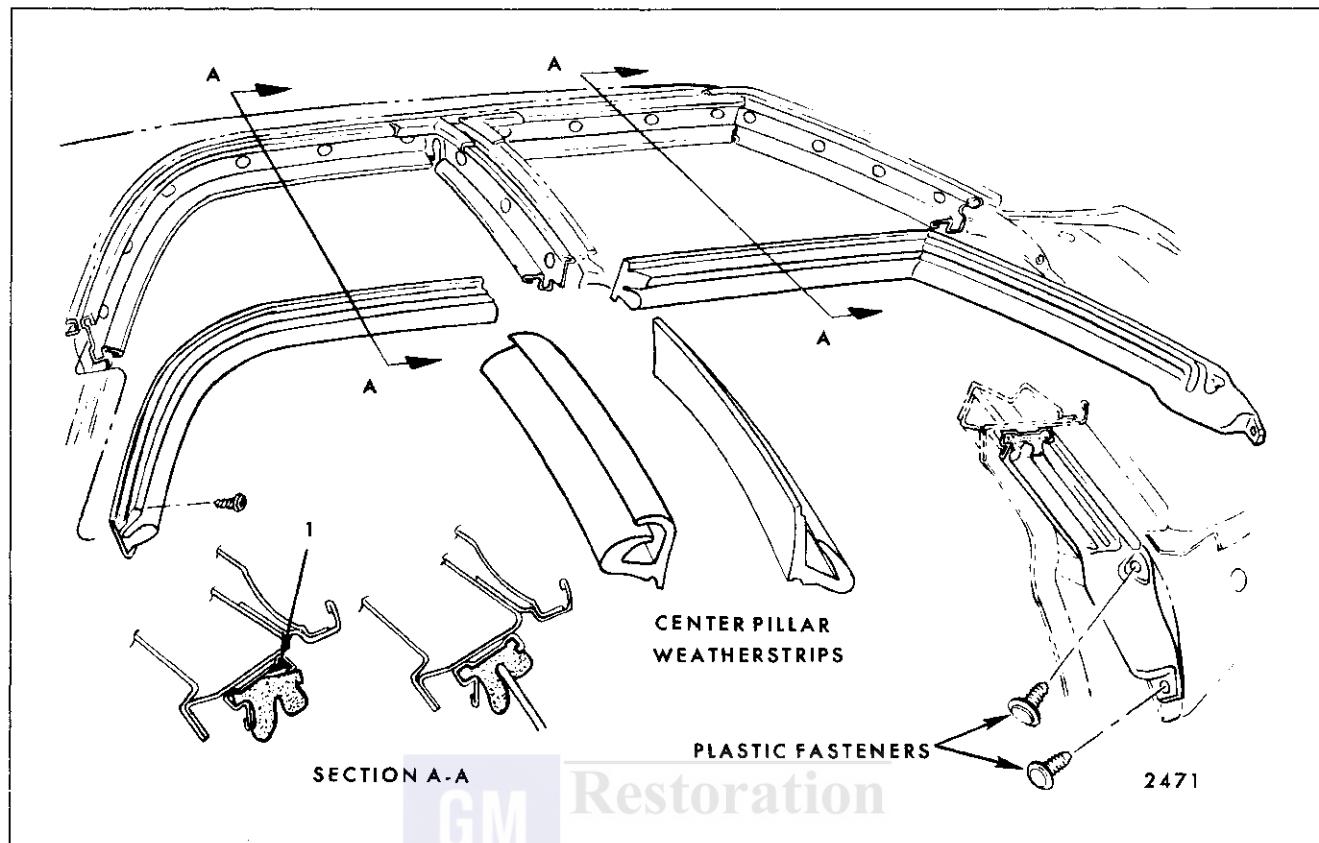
Side Roof Rail and Center Pillar Weatherstrips — "C-69" Styles
